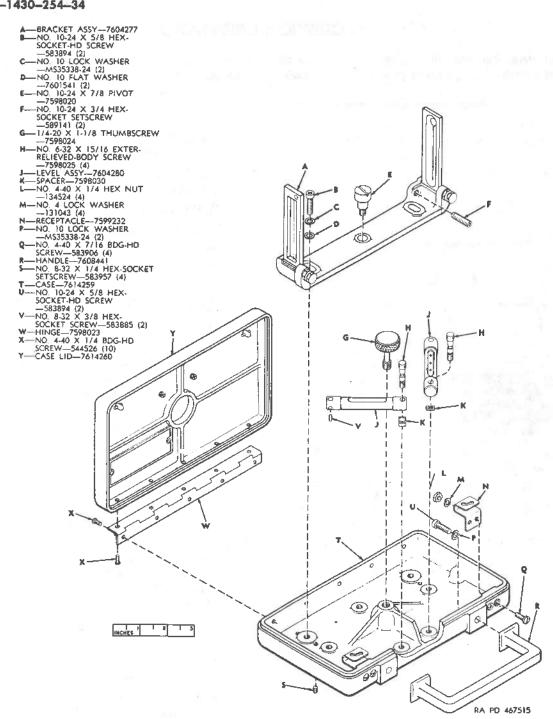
Acquisition orientation level 7614258—partially exploded view.
